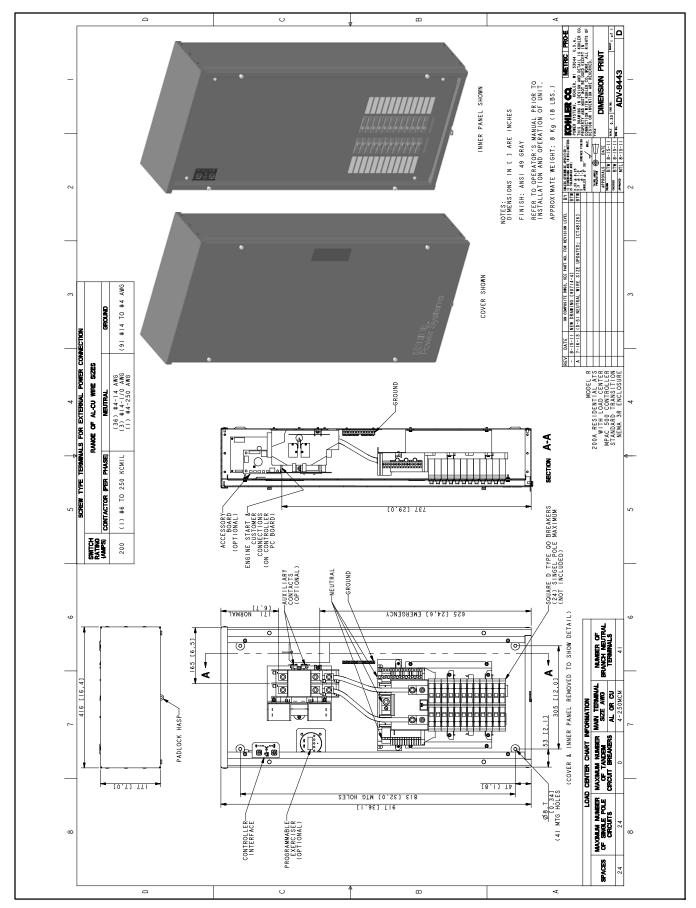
Dimension Drawing, 200 Amp NEMA Type 3R Enclosure with Load Center, ADV-8443
